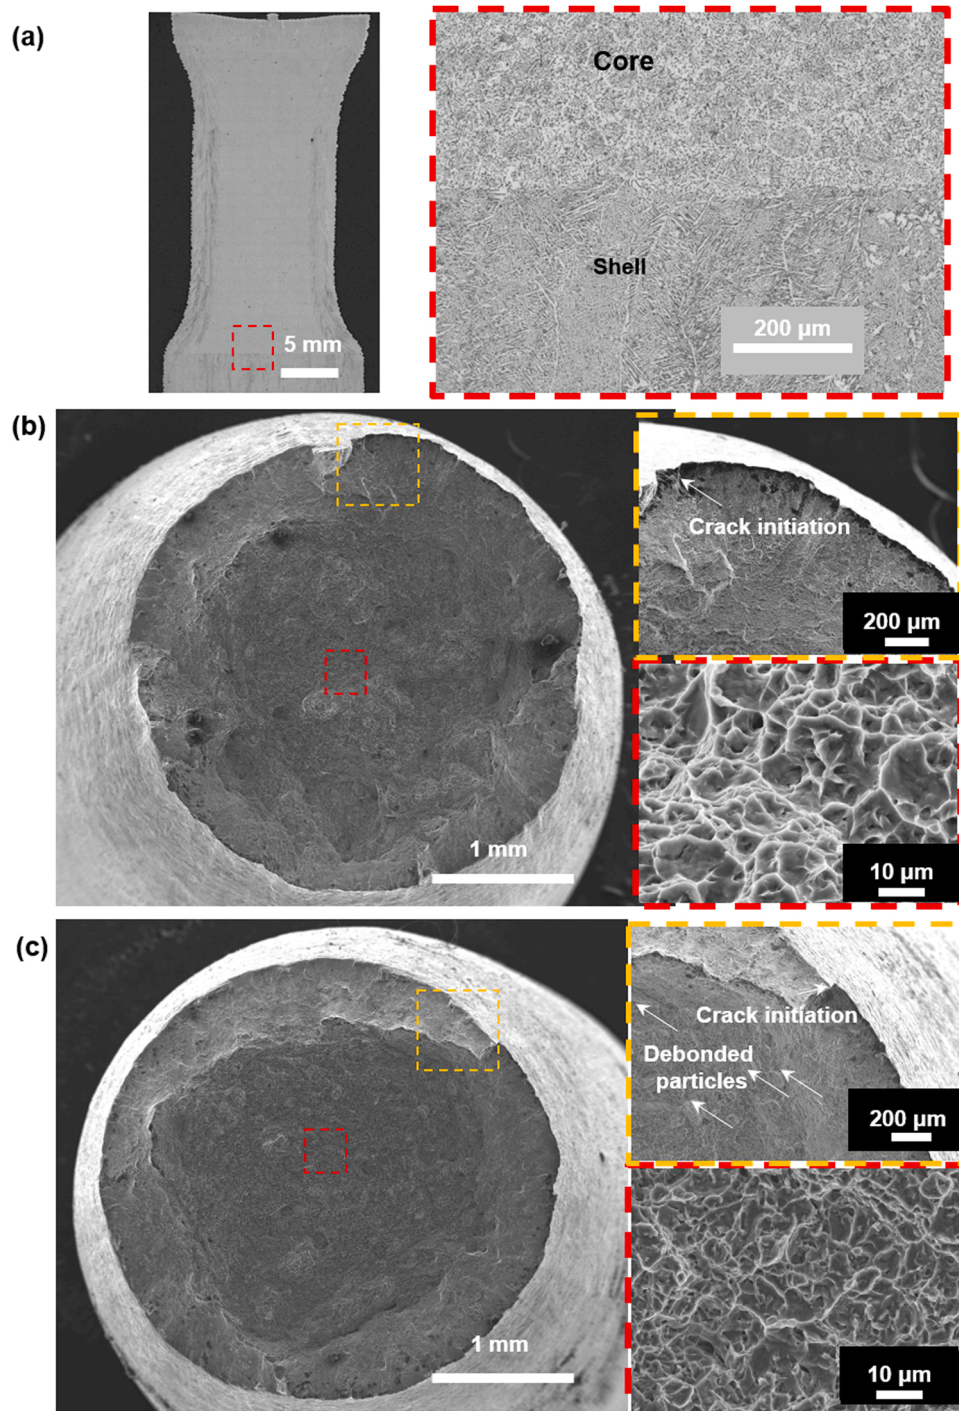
(a) HIPped region of a tensile specimen before being machined with an enlarged view of the interface between core and shell regions. (b) SEM surface fracture of tensile sample A, with a crack initiation region, and its ductile fracture. (c) Tensile sample B surface fracture, with a crack initiation region and particles debonded, and its ductile fracture.
